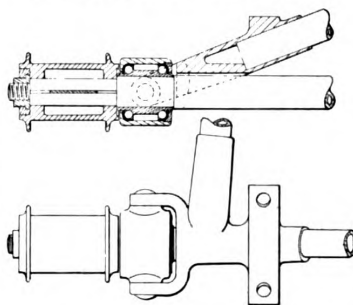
REAR AXLE AND BEARING CONSTRUCTION.
